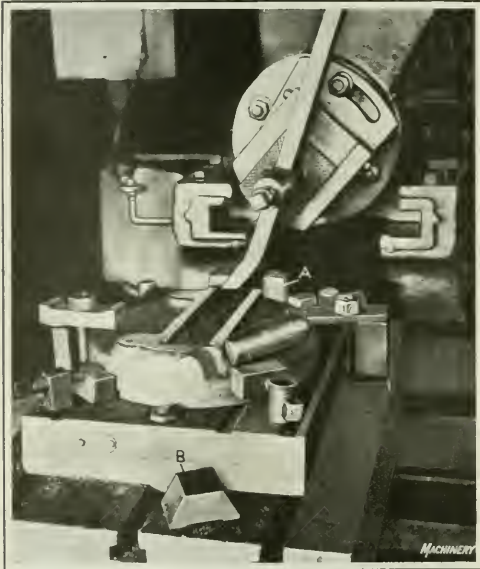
A 24-inch Shaper equipped for planing the Dovetail Bearing and the Horizontal Face of Front Plates for Planer Frictions
